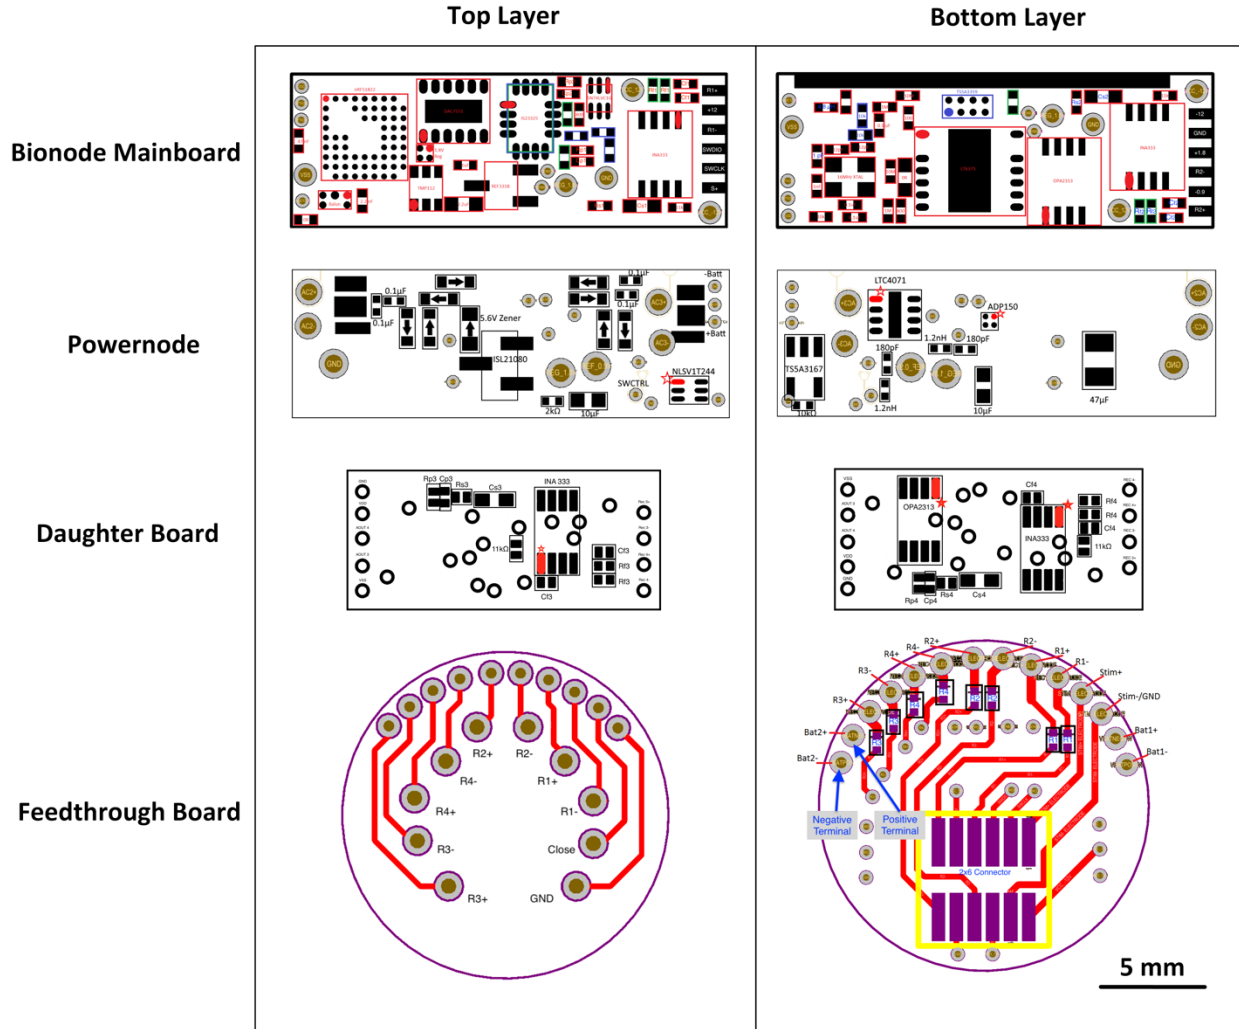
Top and Bottom layers of all four printed circuit boards (PCBs) that make up the Bionode. All PCBs were optimized for size by using a minimum spacing and width of 0.127 mm wherever possible.
